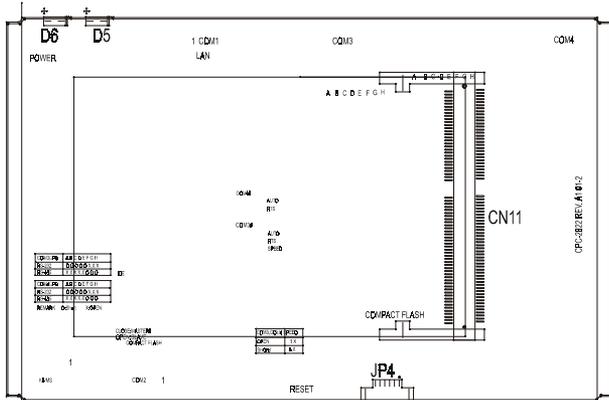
UNO-2041 connector and jumper locations (Bottom View)
